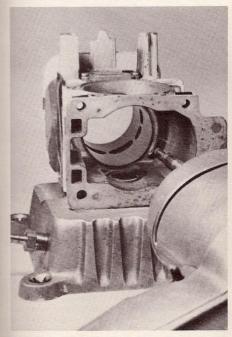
Transfer port enlargement from the bottom a long burring tool or a rat-tail file is required.
